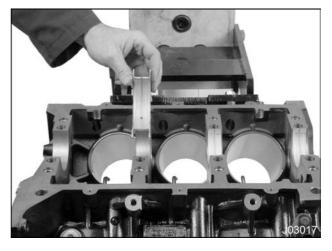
Install upper crankshaft main bearings (thrust bearing shown)
